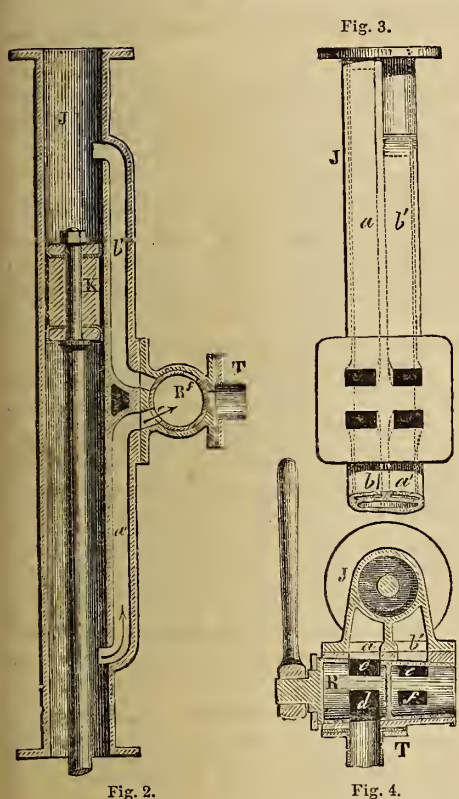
is an elevation of the machine in section through the inlet passages; fig. 2 is an elevation of the cylinder in section through the outlet passages; fig. 3 is a front elevation, showing the passages; and fig. 4 is a plan in section through the passages. J is the cylinder, containing the piston, K, to the rod of which is attached a cross-head, N, to which is also fixed the chisel, M. The cross-head and chisel are guided by the guide-rods, O O, which are fixed in a plate dovetailed into the cylinder cover, in such a manner, that it can be freely turned round (with the piston) by means of the handles, P Q, and thus enable the chisel to take a fresh cut at every stroke, without which it would jam. The annexed sketches show the shape of the chisel and its cutting edge.
